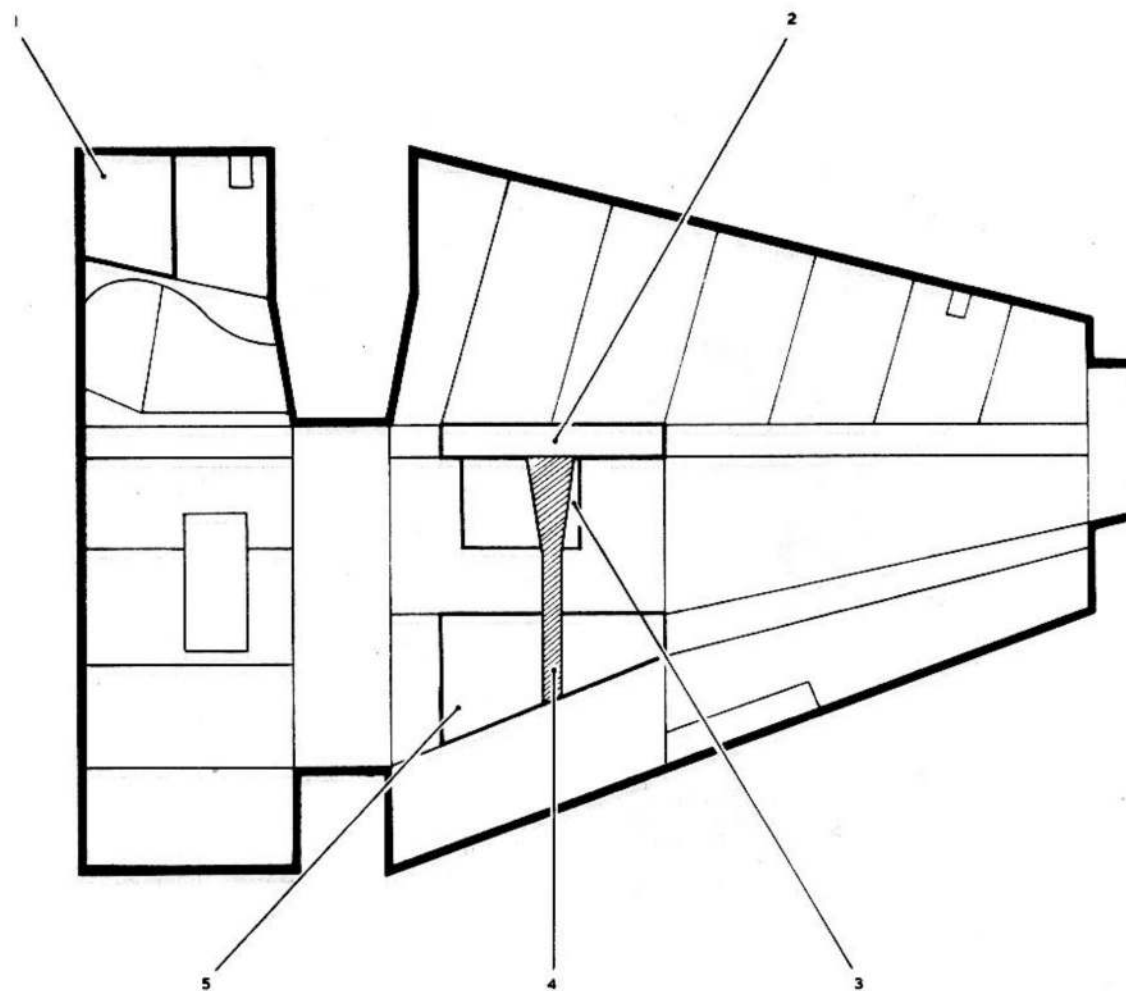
MAIN-PLANE SKINNING, LOWER SURFACE
